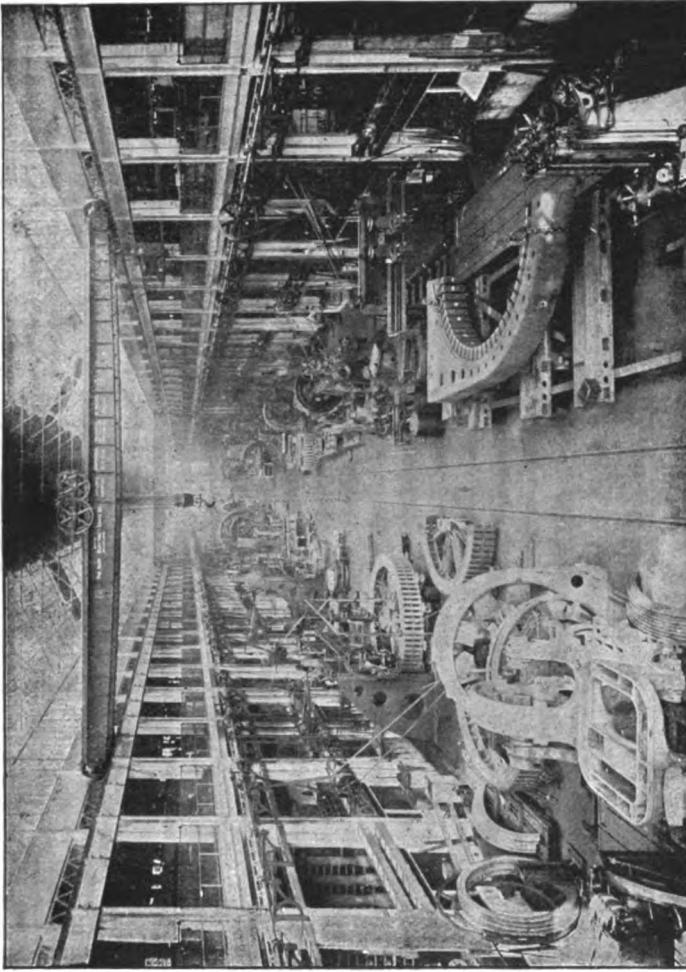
30-TON ELECTRIC CRANE AT THE WESTINGHOUSE WORKS, PITTSBURG.
